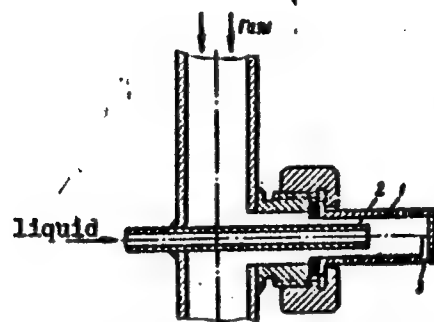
1- nozzle casing with a flat bottom; 2- feeder tube;
